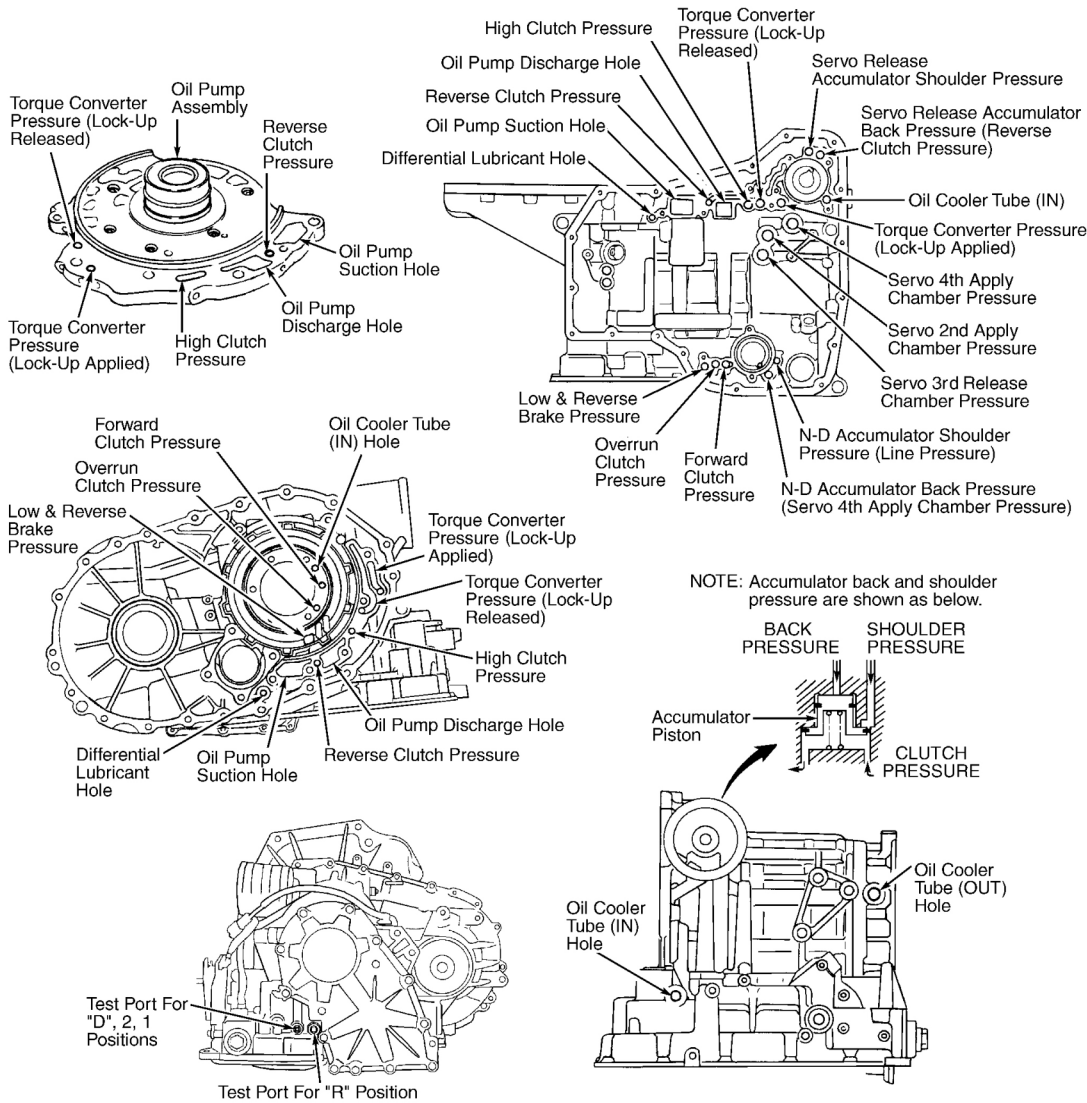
Identifying Hydraulic Fluid Passages (RF4F03B/W Transaxle)
